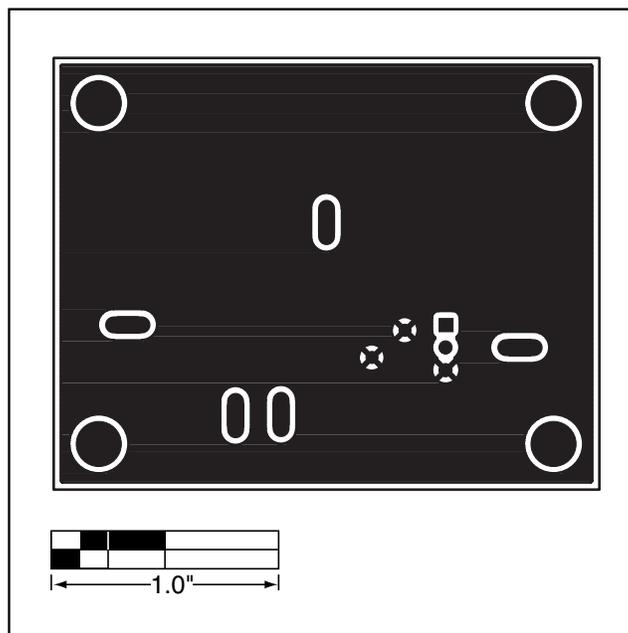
MAX1896 EV Kit PC Board Layout—Solder Side
